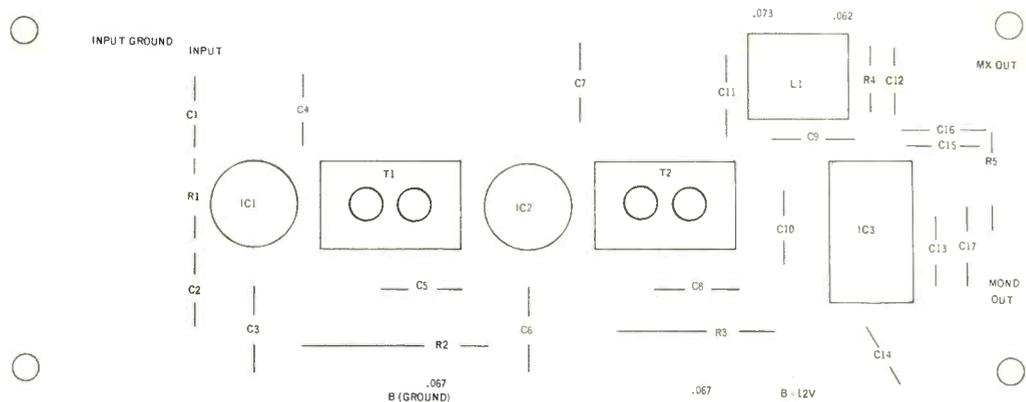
Board viewed from the components side. Decimal dimensions refer to oversized holes to be drilled. All other holes are drilled .040 to .050 in diameter.
